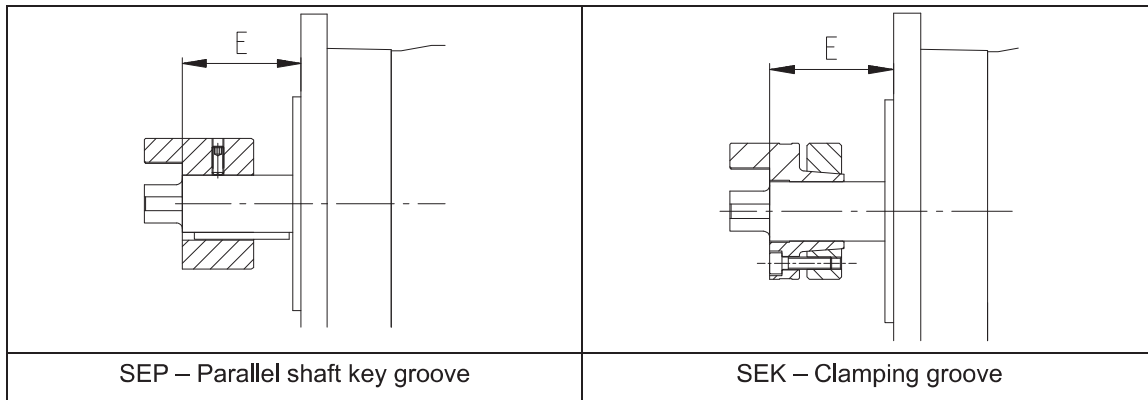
Fitting the coupling onto the motor shaft - various types of coupling
